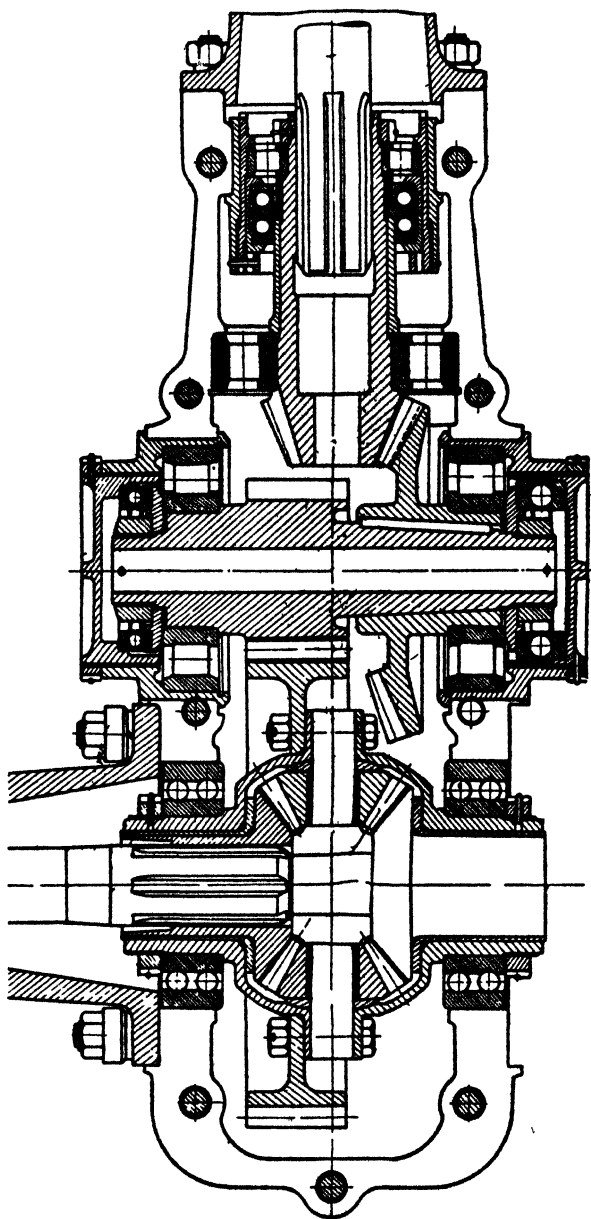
DOUBLE-REDUCTION DRIVE WITH ALL SHAFTS IN THE SAME PLANE.
